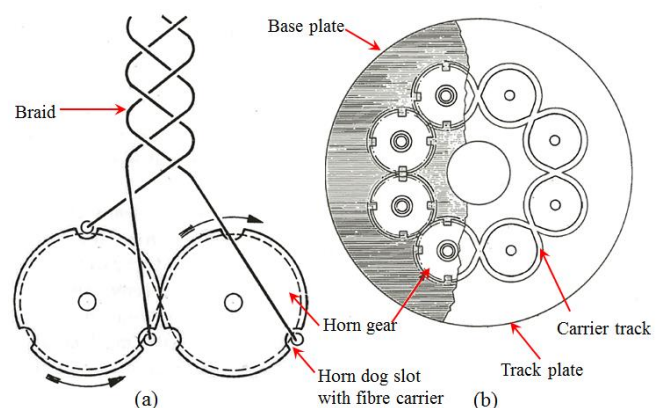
Schematic of (a) a three thread braiding process (b) horn gear in between track and base plate in a tubular braider[8]
